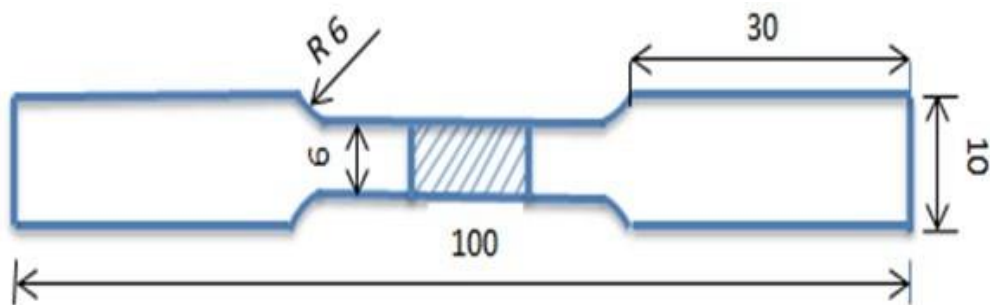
Schematic sample for tensile test (all dimensions are in mm)
